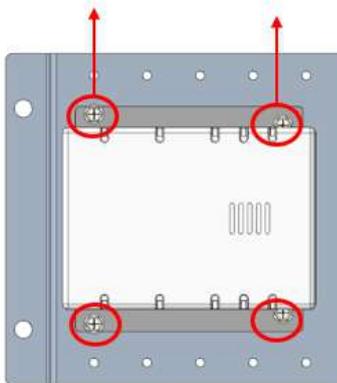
32 Remove the fixing screws of the combustible gas detector
